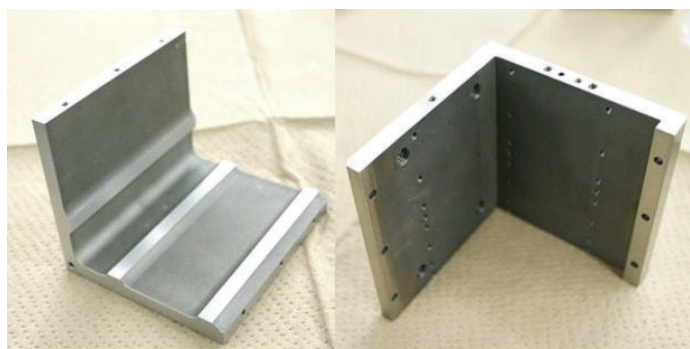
Pictures of Case with 3 reference planes(left), Case with fixing holes(right)
